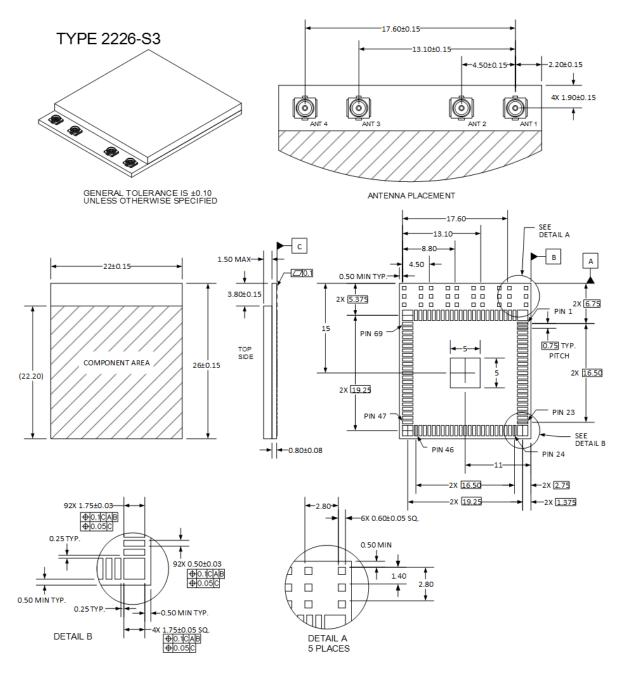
M.2 Type 2226-S3 Mechanical Outline Drawing Example
